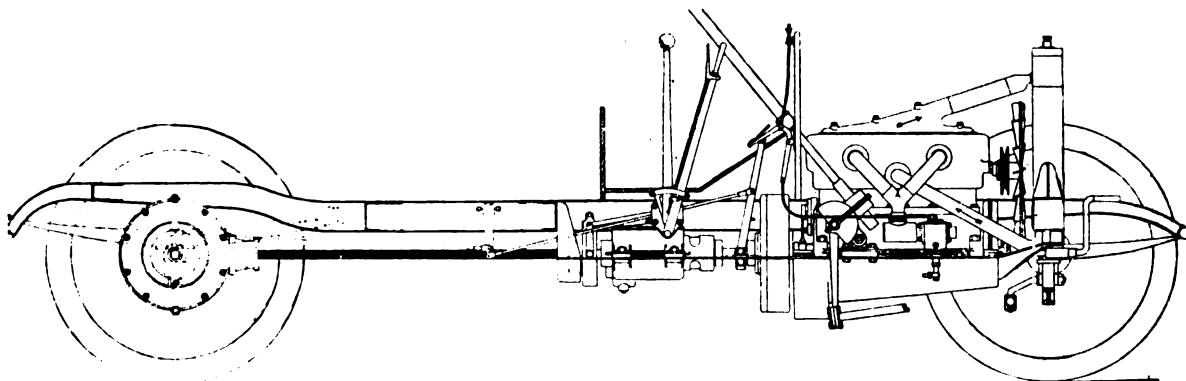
Chassis of Vauxhall 20-h.p. Car.
